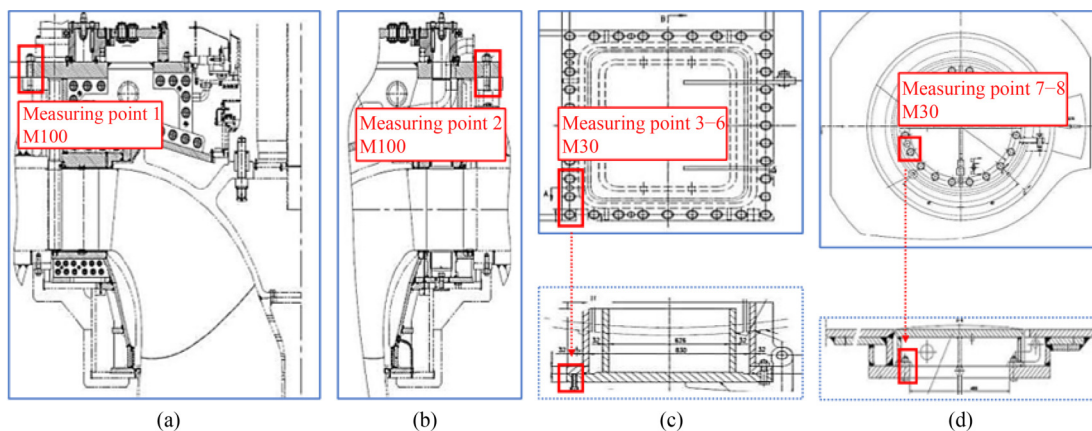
Measuring point arrangement: (a) top cover; (b) seat ring; (c) volute door; (d) cone door.
